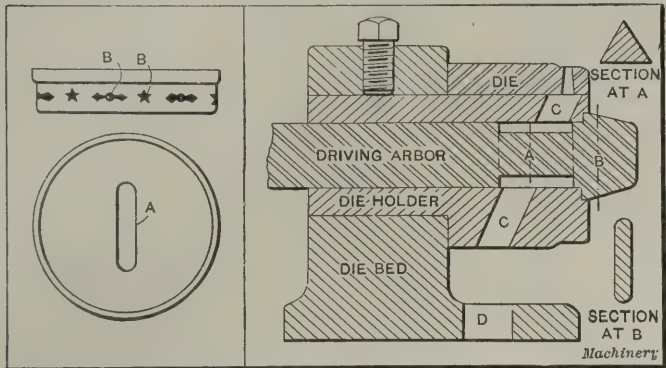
Example of Shell to be perforated Fig. 5. Section of Die Bed, Holder and Die for Perforating Shell in Fig. 4
